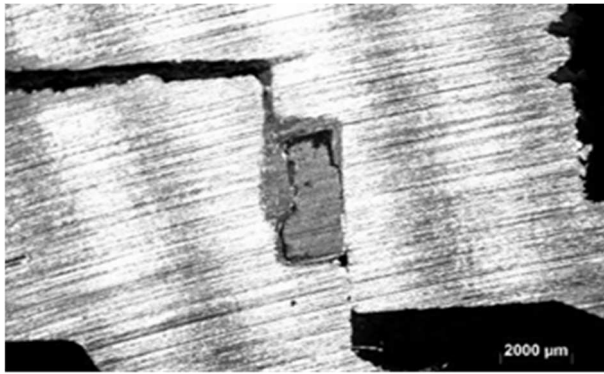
The lid assembly cross-section after exposure in FLiNaK
